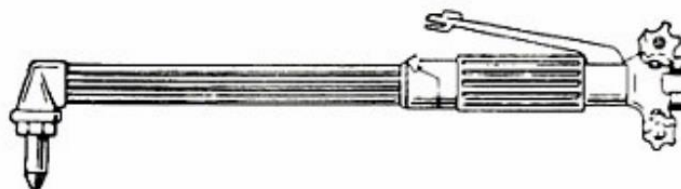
Styles Of Cutting Torch Equipment ("blowpipes"), from [102]
